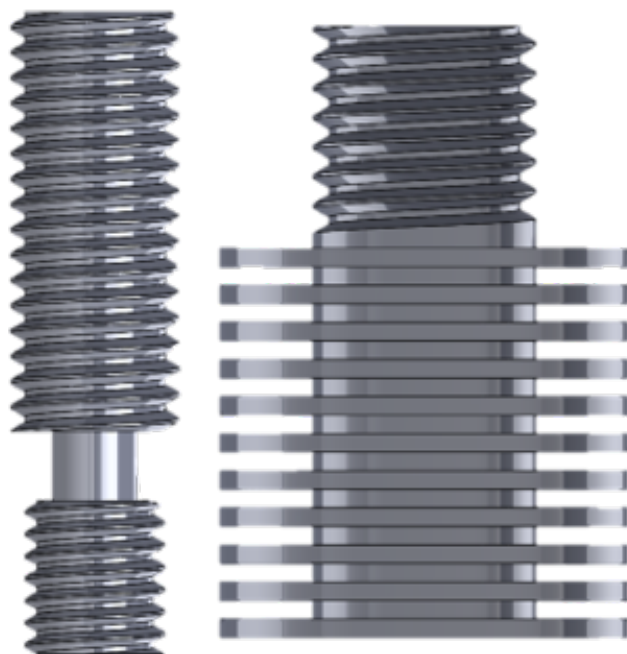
CAD representation of the heat break (left) and heat sink (Right) of the extruder assembly.
